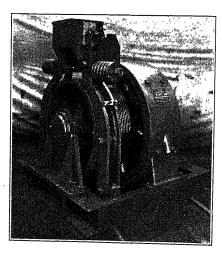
Elevator Motor in Which Every Part is Welded Except the Rope Sheave
